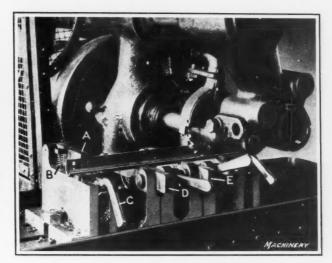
Milling Ball Groove along Steel Carriage Rail
